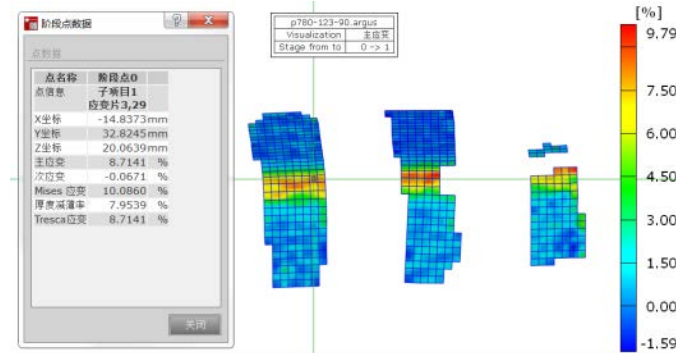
The strain distribution for the bending part of DP780 of 1.5 mm with bending angle of  $90^\circ$ . There are 3 parts in the figure.
